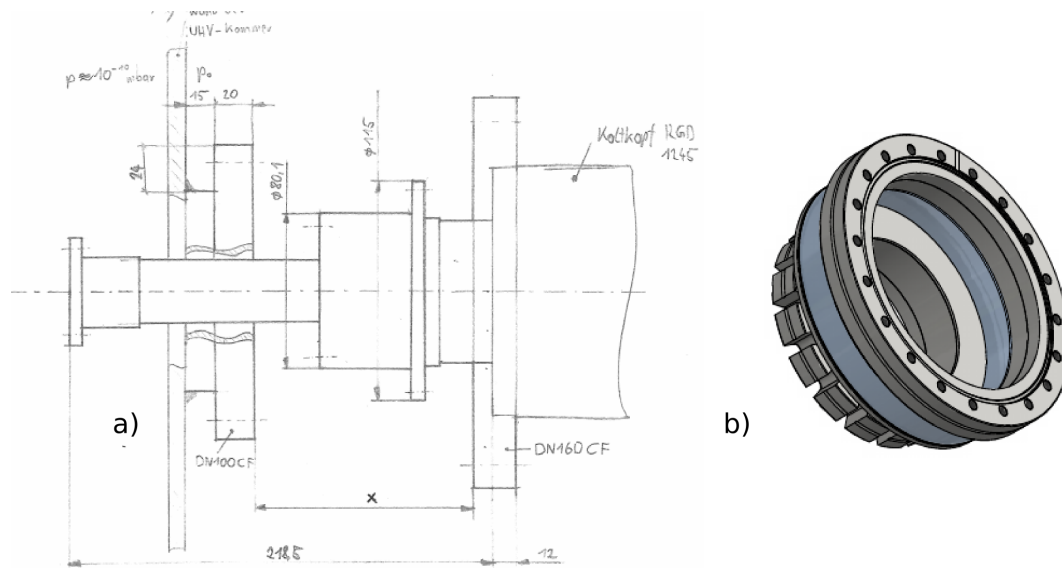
Cold-head reaching into the main-chamber including most important dimensions (a). Membrane- flange from COMVAT (b). The blue middle part indicates the welded membranes for vibration decoupling.
